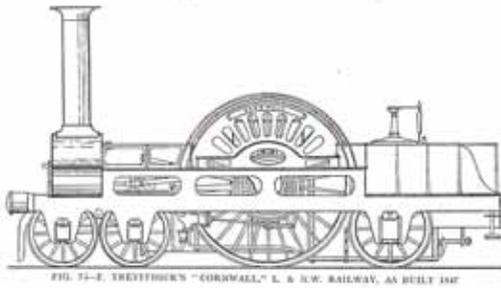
TREVITHICK'S "CORNWALL" L. & N.W. RAILWAY, AS BUILT 1814
